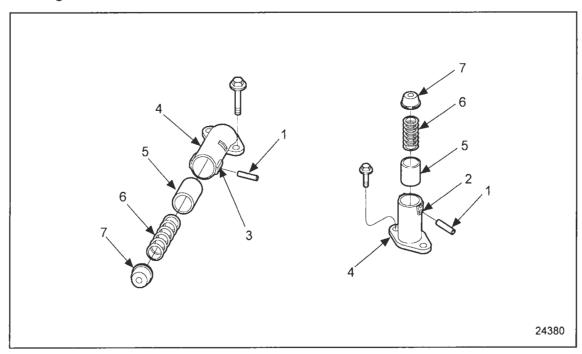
Oil Pressure Regulator and Relief Valve Mounting
